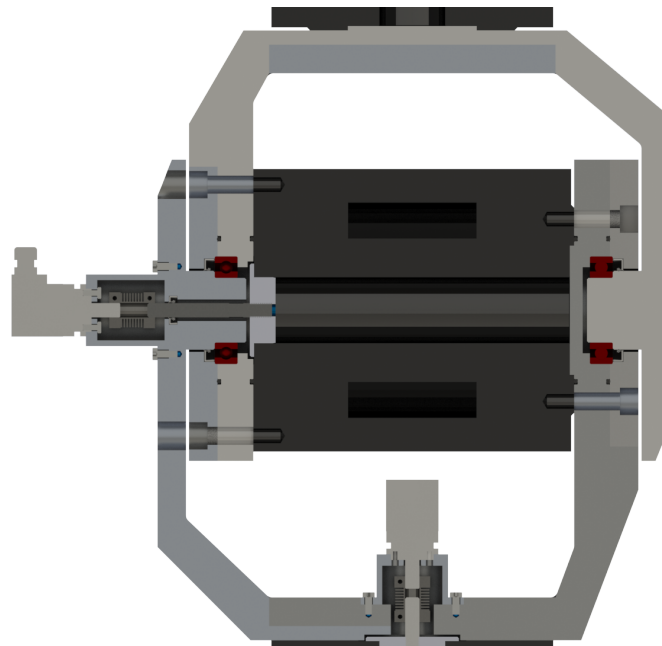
Cross-section of the manipulator joint 6 with highlighted bearings
